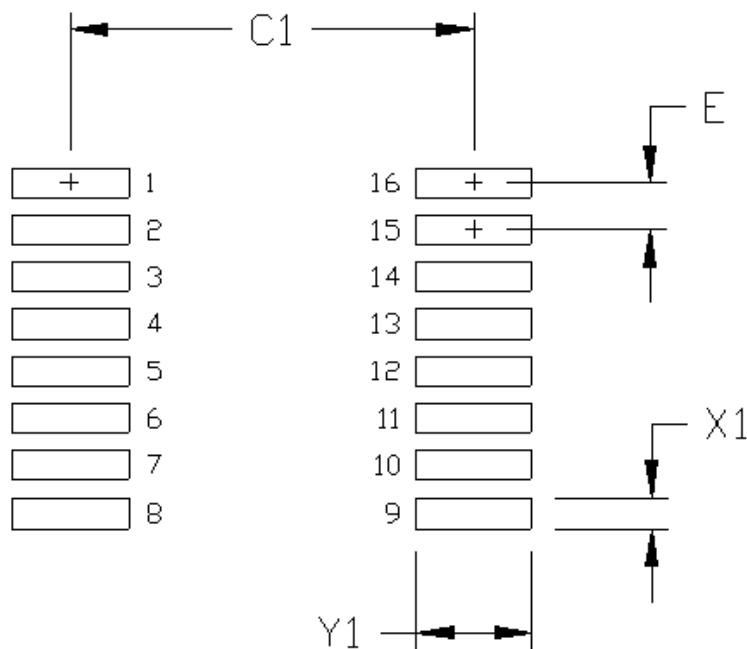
16-Pin QSOP PCB Land Pattern
